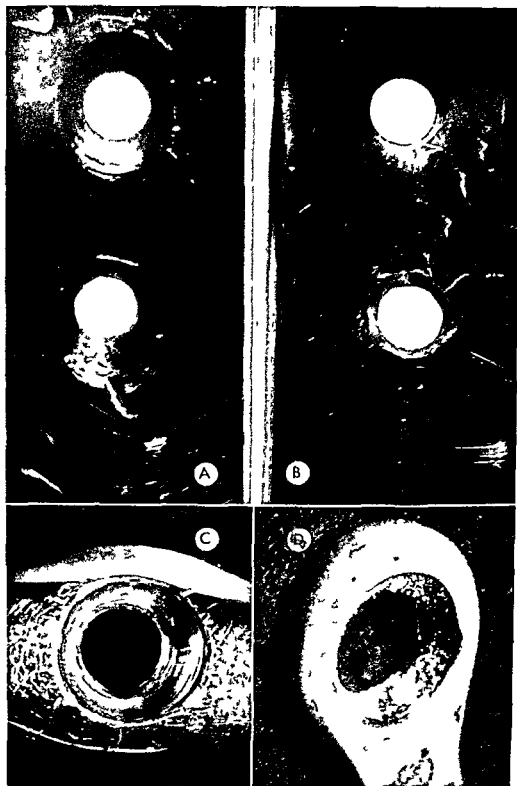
(A B C and D) Photographs of four plates which have been damaged by allowing the rotating drill to touch them A. much as 2 mg of drill bit metal may be transferred to the plate Corrosion might be expected to follow
